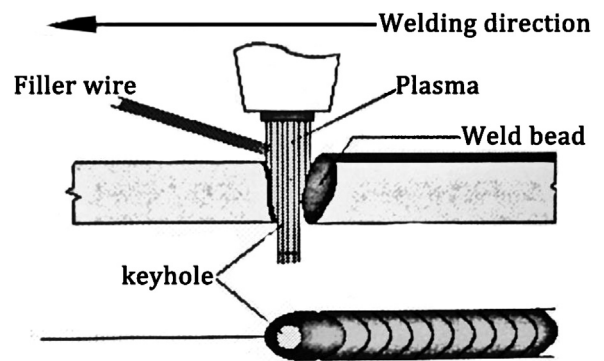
Schematic of keyhole plasma arc welding.
